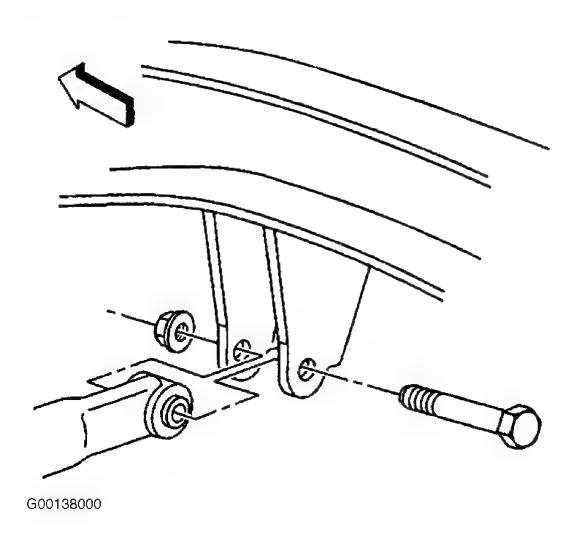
Removing Rear Tie Rod Mounting Nut & Bolt Courtesy of GENERAL MOTORS CORP.
